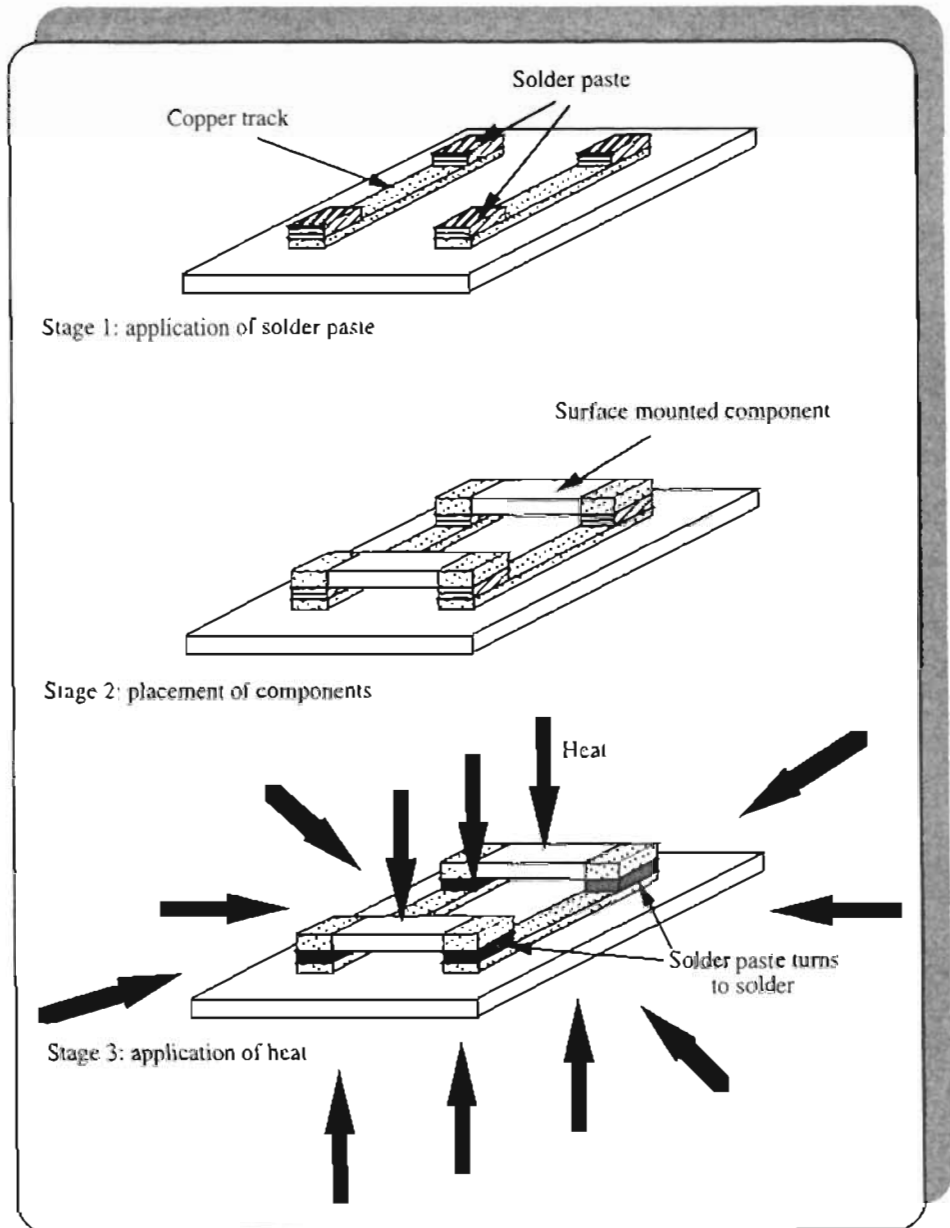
One type of surface mount assembly in which solder is applied, in the form of paste, before components are placed in position. Once assembled, applied heat allows soldered joints to be formed
